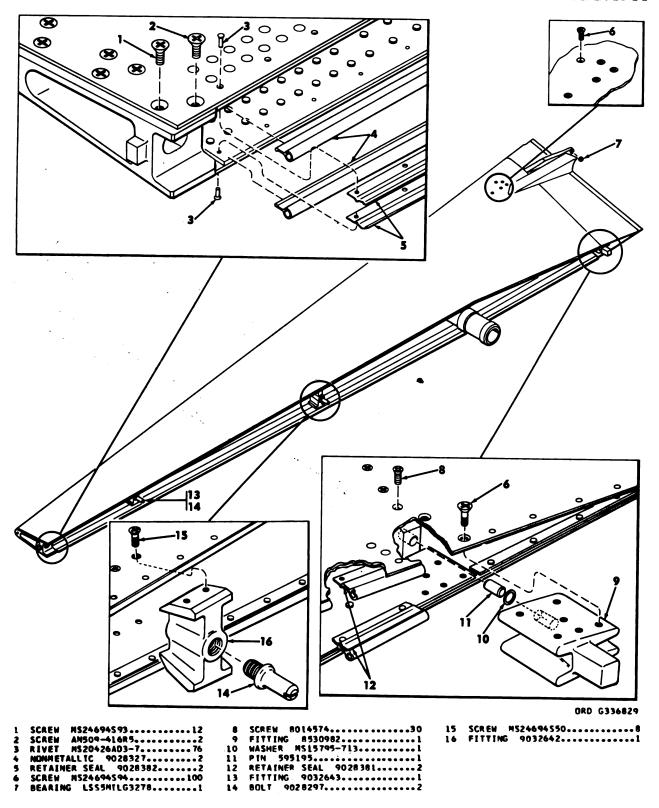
FIN, STRUCTURF ASSEMBLY /9028313/ /SEE FIGURE 20 FOR NEXT HIGHER ASSEMBLY/
